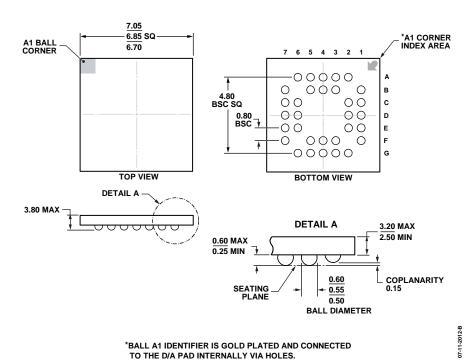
32-Lead Ceramic Ball Grid Array [CBGA] (BG-32-3) Dimensions shown in millimeters
